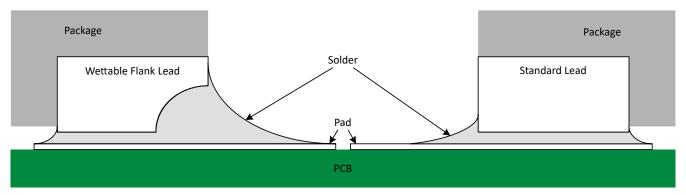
Simplified Cutaway View of Wettable-Flank QFN Package and Standard QFN Package After Soldering
